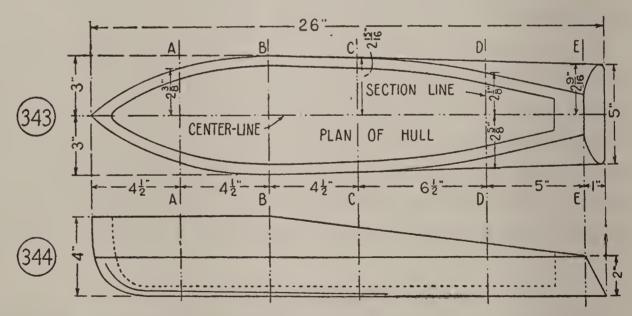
Plan of Hull. Fig. 344.—Side Elevation of Hull.
